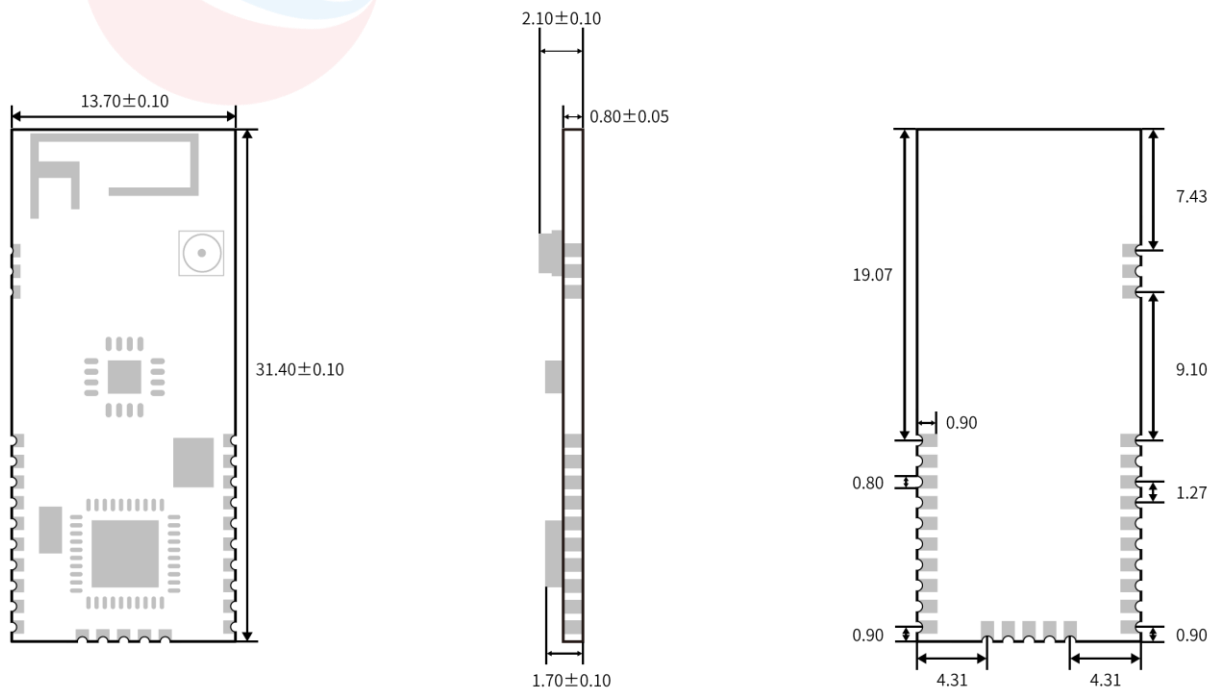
Recommended PCB Footprint of RF-BMPA-2541B1 (mm)
